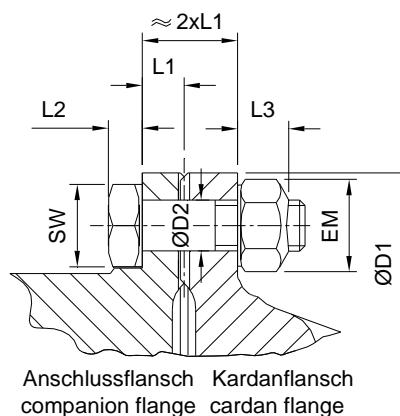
Bolting KV flanges - Connecting flange / Cardan flange
